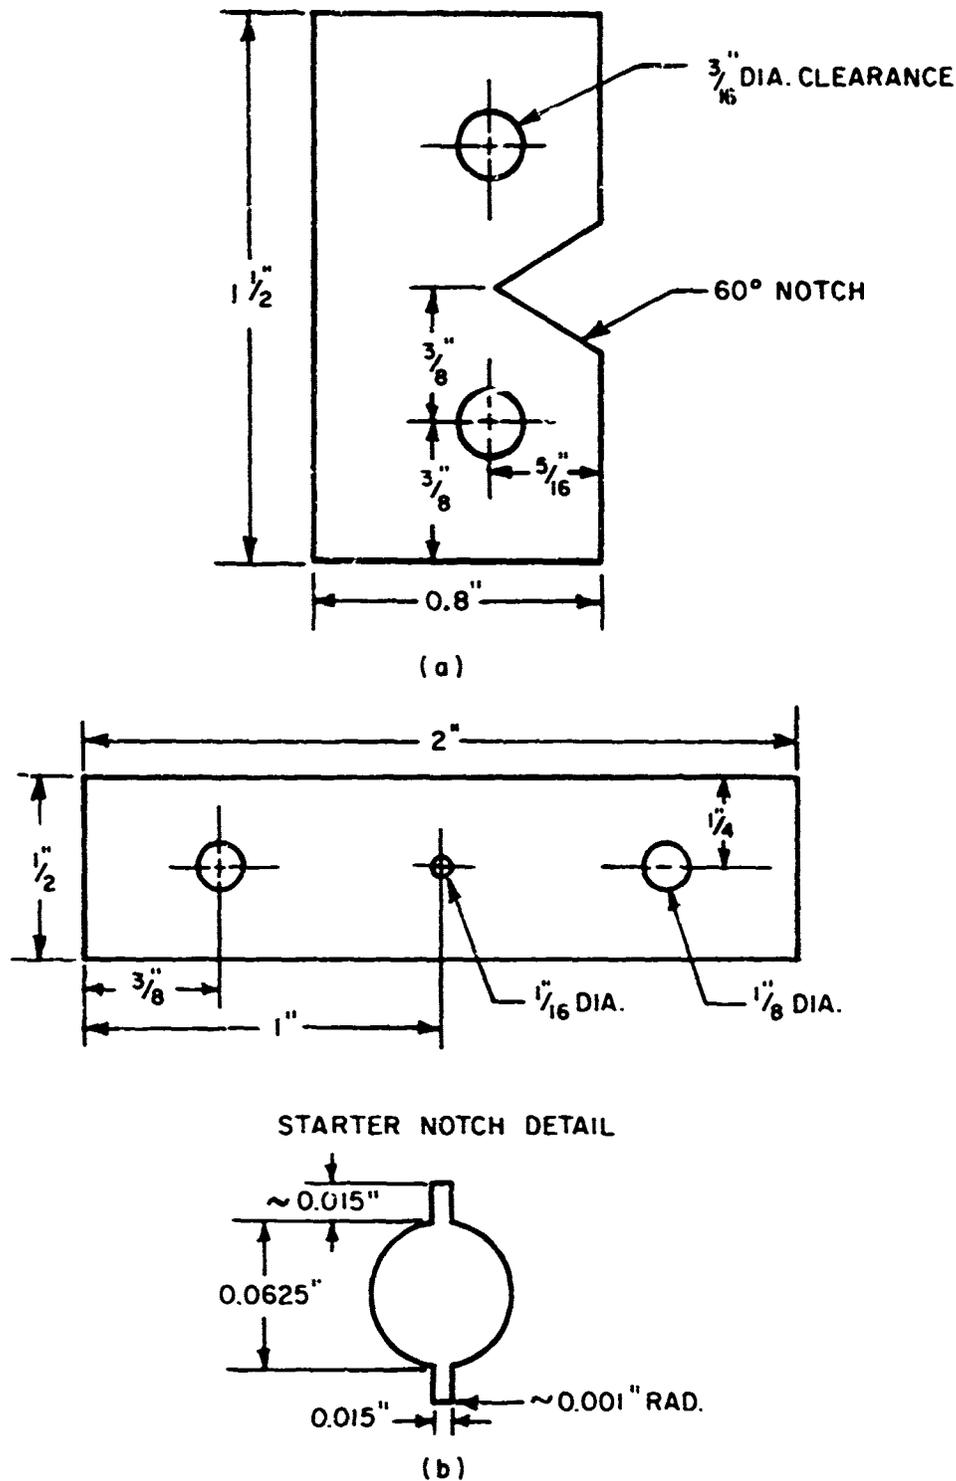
Test Samples Used in Toughness Studies: (a) Tearing Test; (b) Fatigue Crack Propagation Test.
